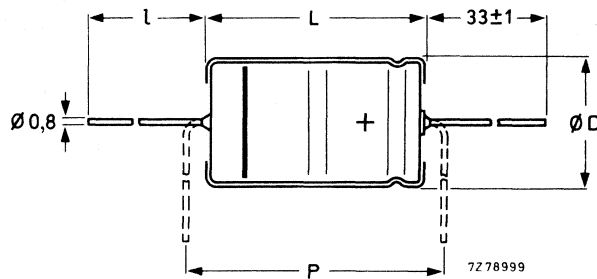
Style 1; see Table 3 for dimensions ϕD , L, l and P.
